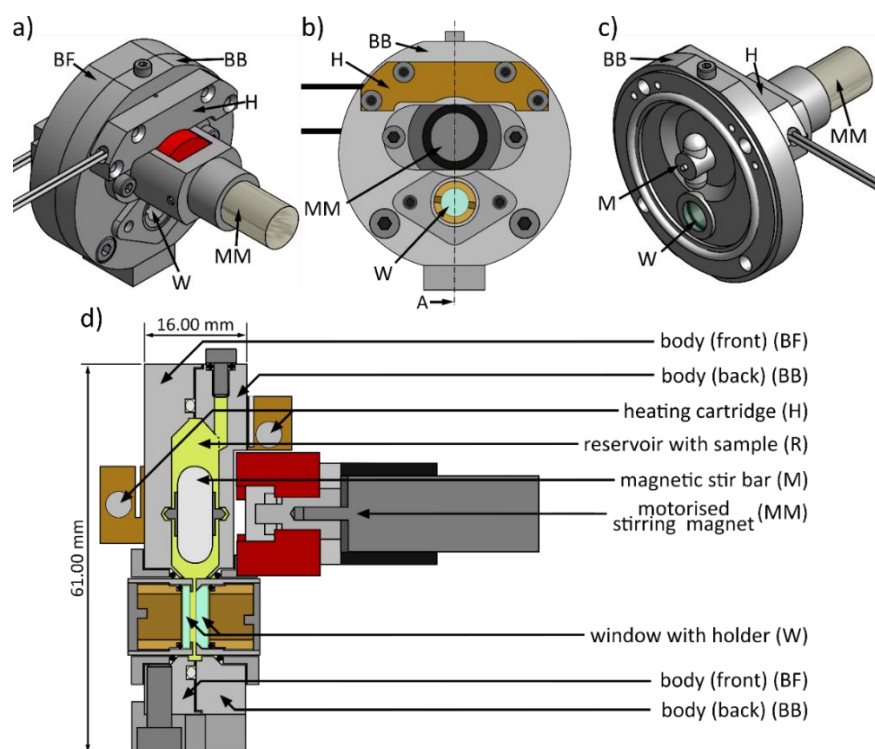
Schematics of the heatable hermetic stainless-steel cell. a) angled view of the back side, b) rear view, c) angled view of the inner side of the back half, d) cross section perpendicular to b) at A.
